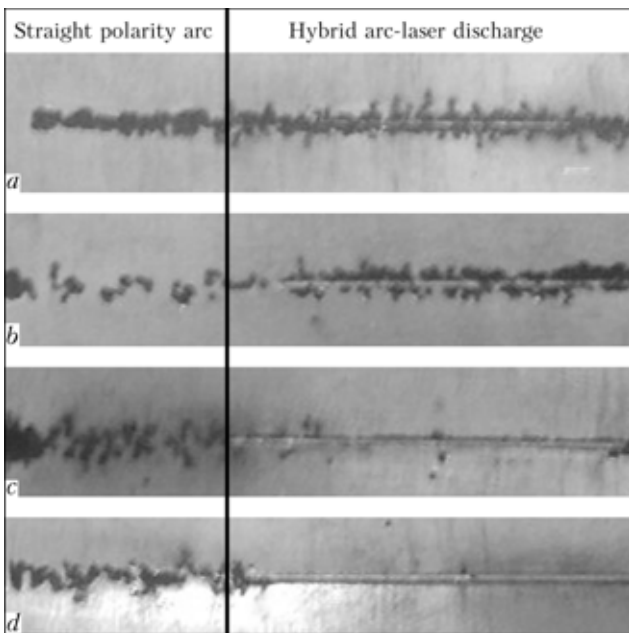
Weld penetration on aluminum surface in conditions of straight polarity arc and hybrid arc-laser discharge
